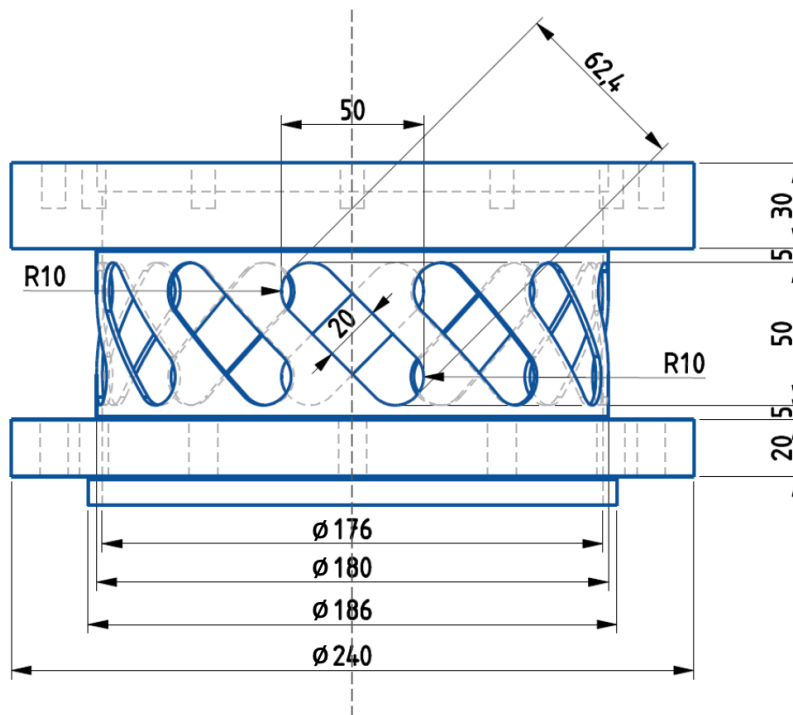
Design of the KU-version of the ATMD with dimensions in millimeter.
